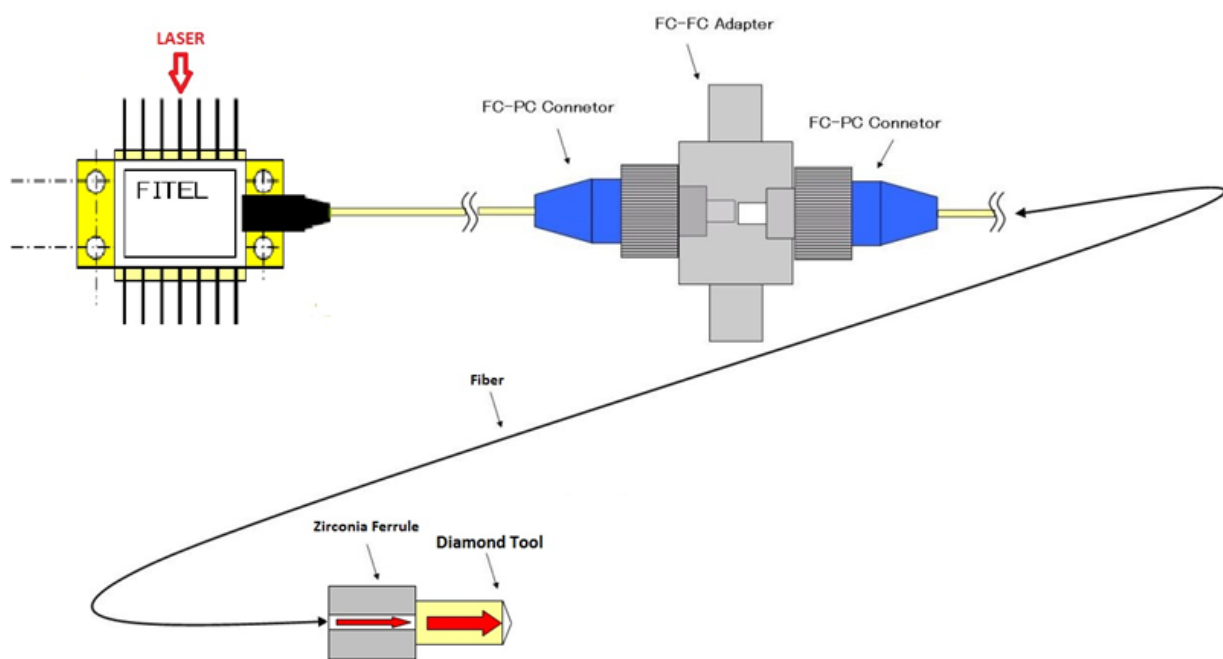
The schematic μ -LAM system configuration for the 5 μm radius diamond tool setup.
